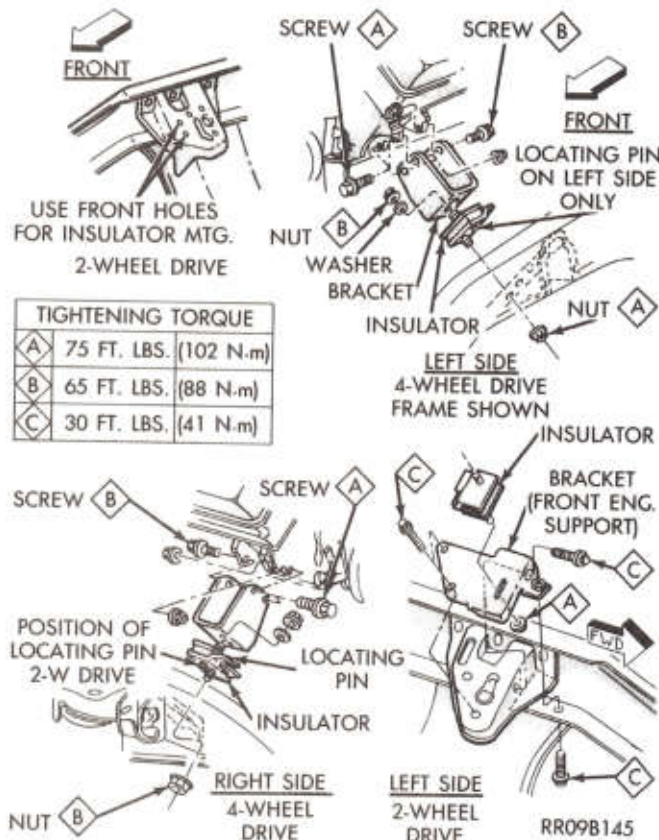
Engine Mounts, Front, 8 Cylinder Engines
